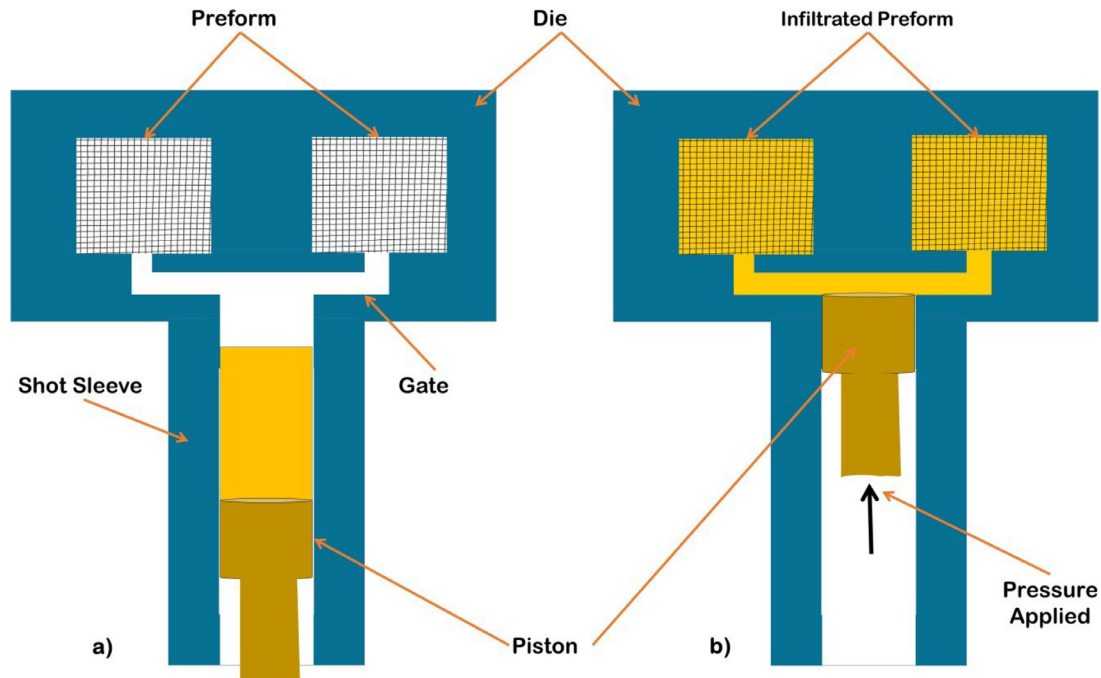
Indirect Squeeze casting a) transfer of melt through shot sleeve b) melt solidification under indirect pressure [229].
